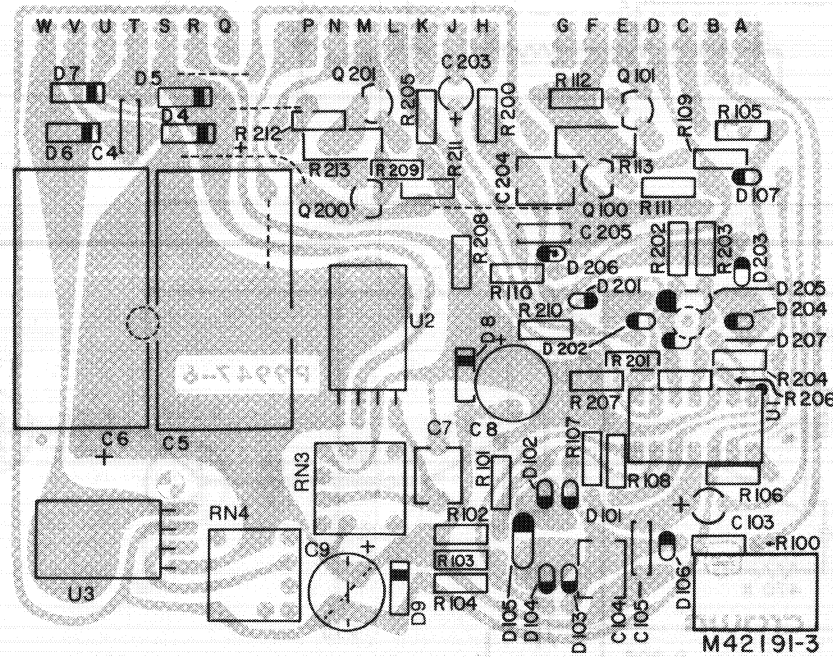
Low Voltage Power Supply Component Board Layout
